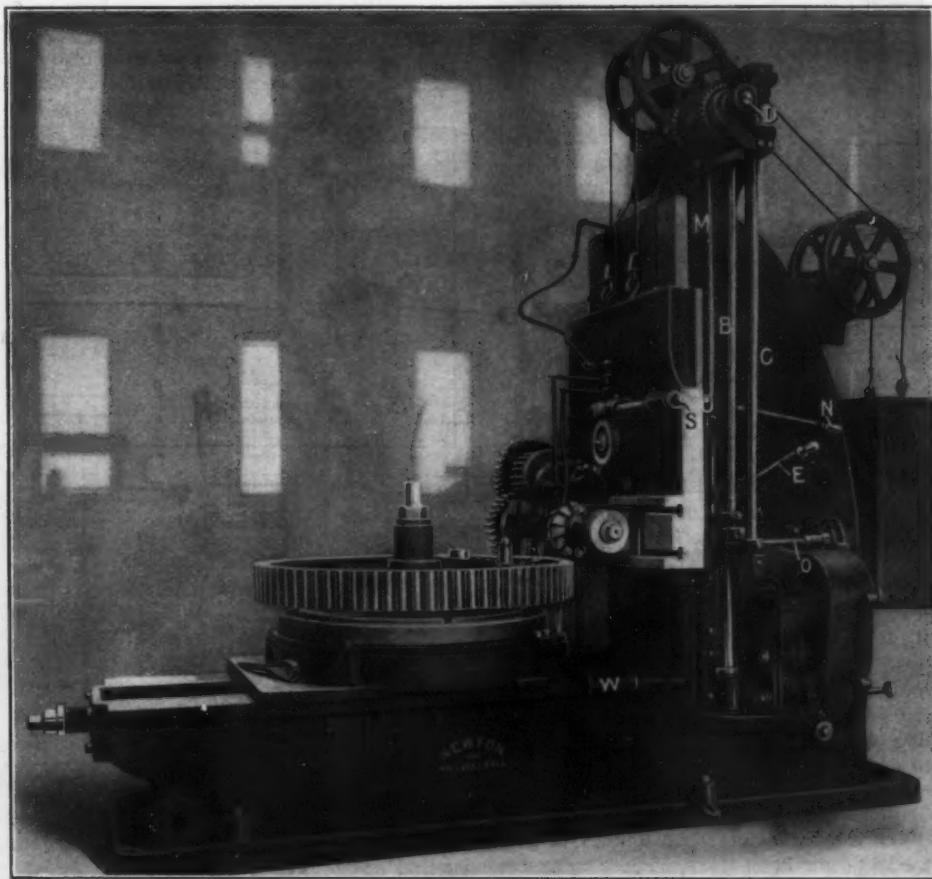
The Newton Spur Gear Cutter with Circular Table Attachment, Cutting a Large Gear.
